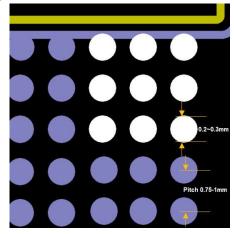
PCB Exposed Pad Land Pattern Via Grid
